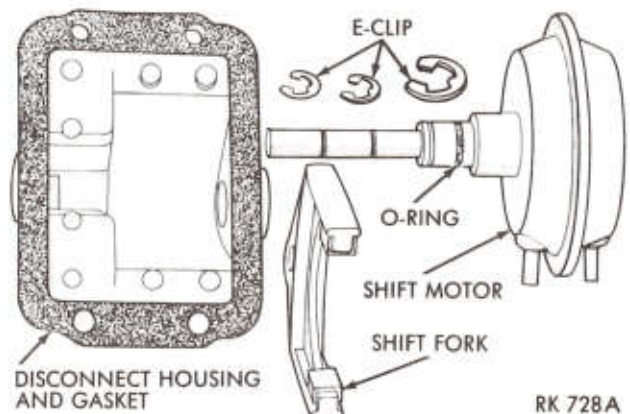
Disconnect Housing Cover Assembly (Disassembled)
